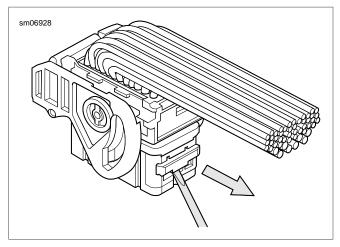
Molex CMC Sealed Connector Secondary Lock
